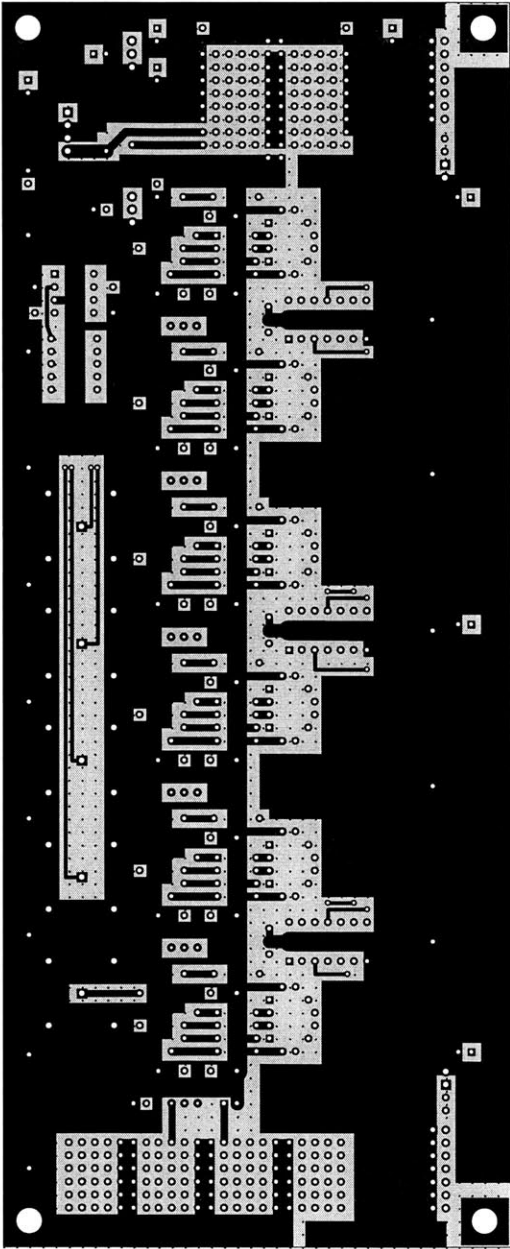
Marx Control Board PCB: Bottom layer of copper
